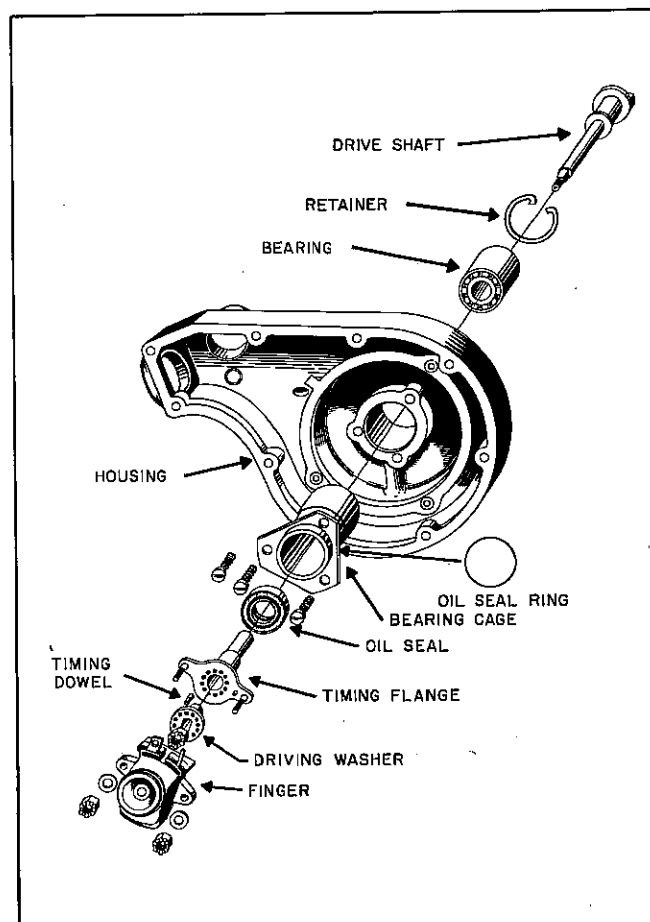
Exploded View of Distributor Showing Relation of Timing Dowel and Washer (Type without gun synchronizer drives).
